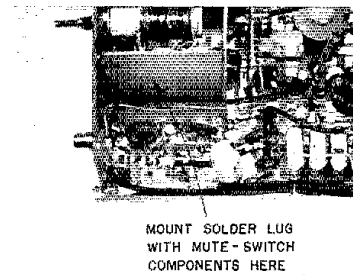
Suggested mounting position for solder lug and mute-switch components in the Universal Receiver. The mute jack is mounted on the rear panel above the antenna jack and the earphone jack.
